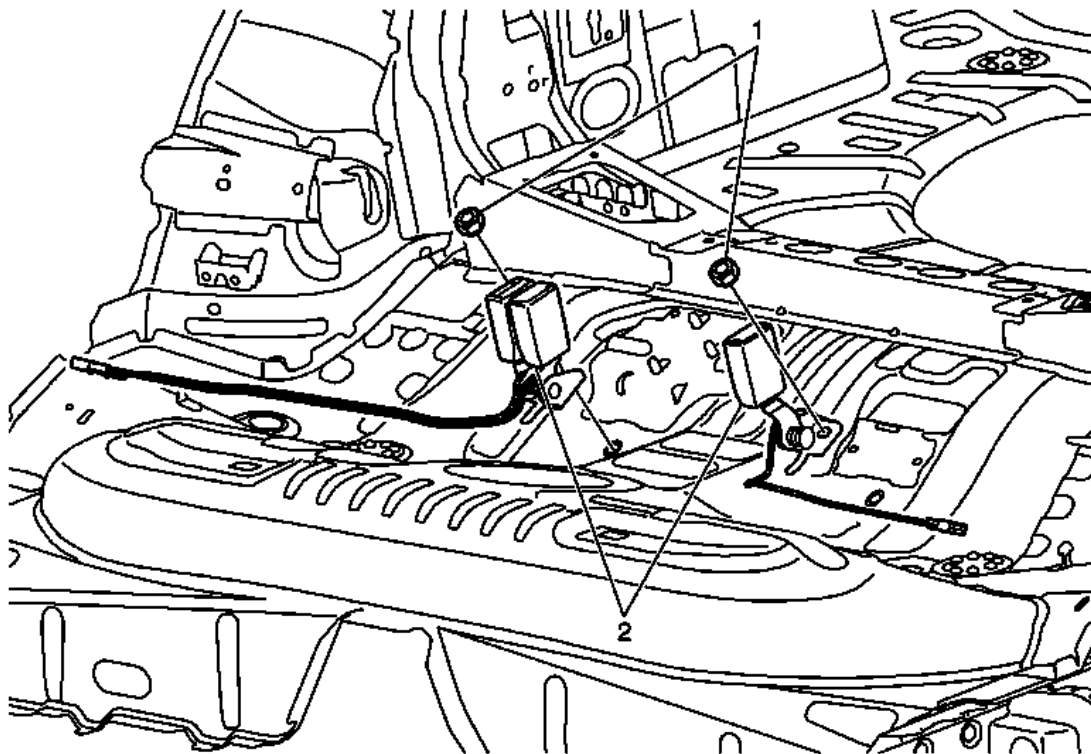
Rear Seat Center Shoulder Belt Buckle & Fastener
